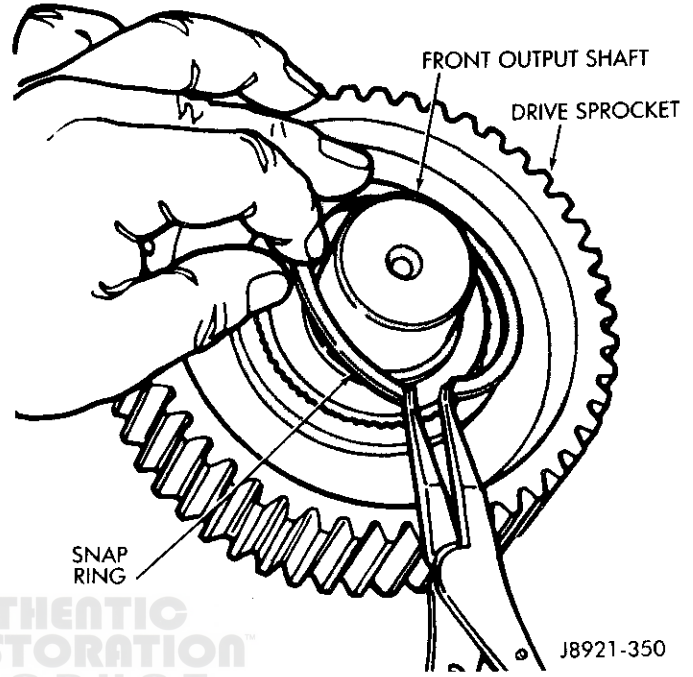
Assembling Drive Sprocket And Front Output Shaft
